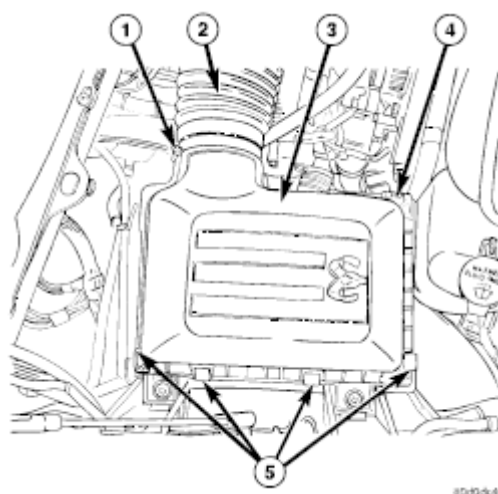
Identifying Clamp And Air Duct At Air Cleaner Cover
